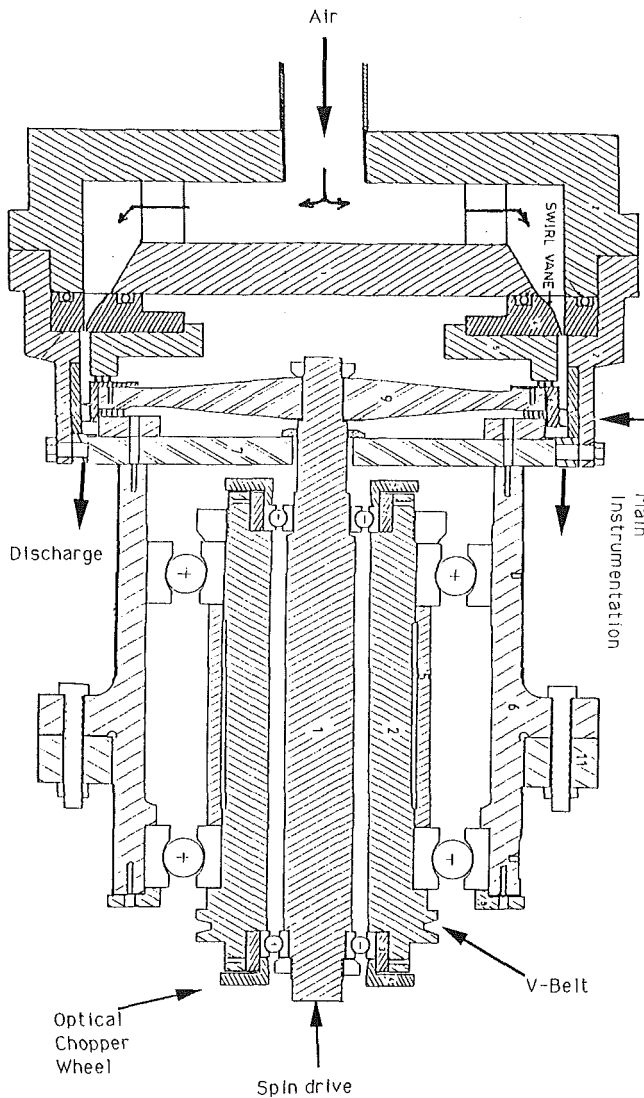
Cross section of test section and nested spindle spin/whirl producing rotating machinery
